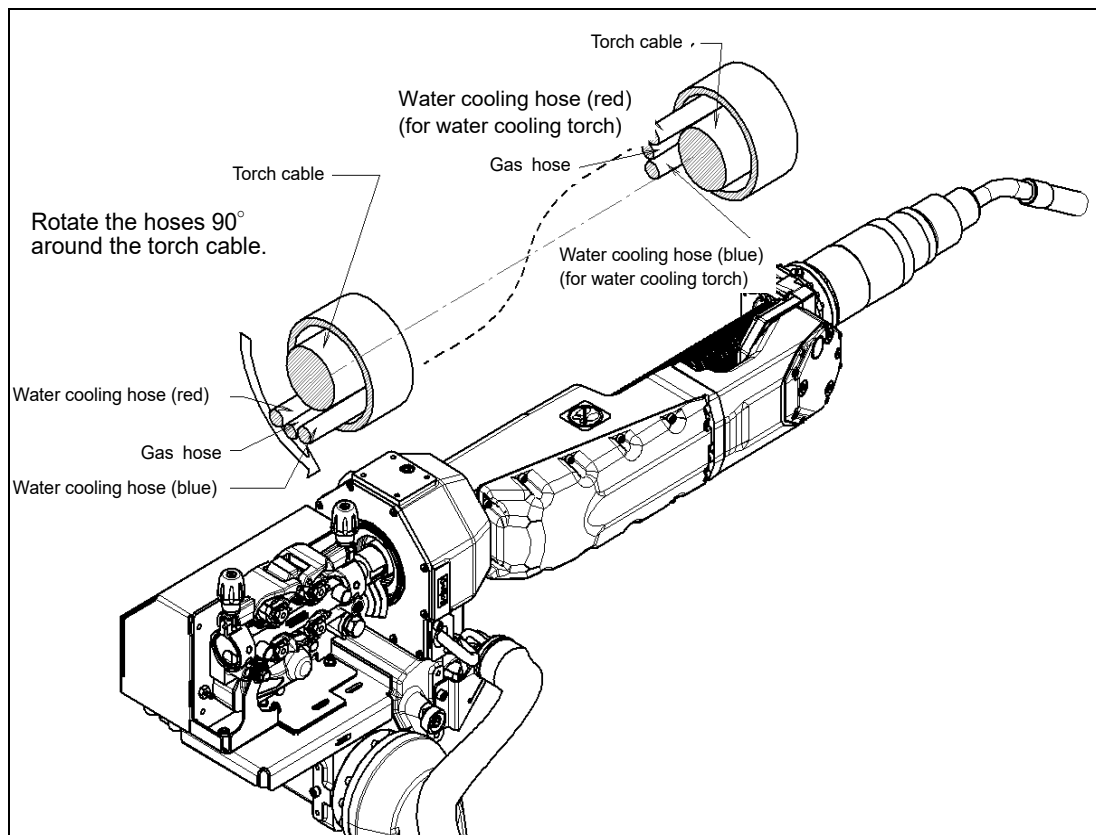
(i) Confirming of no clearance of torch cable
